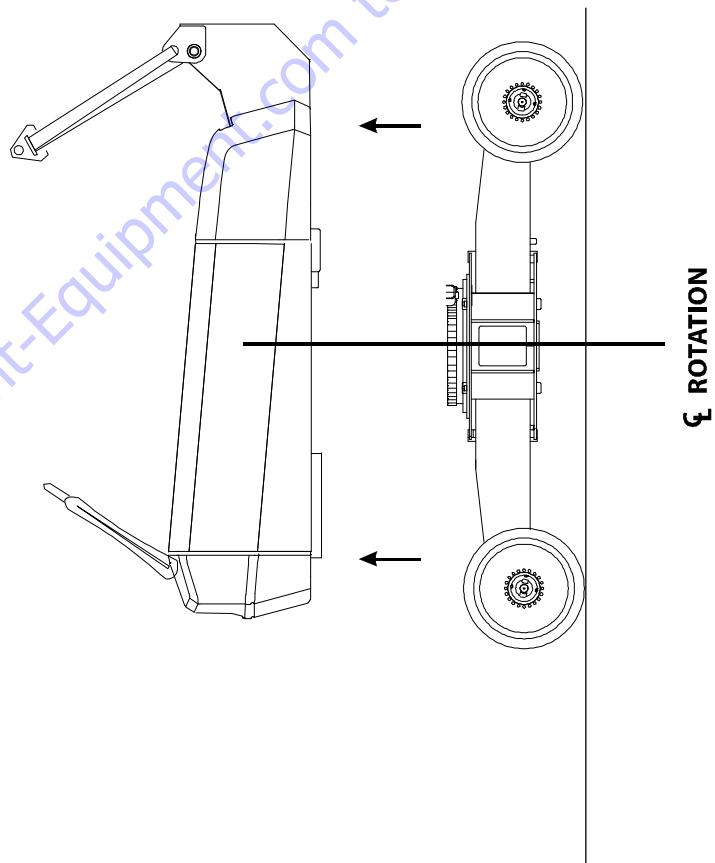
Swing Bearing Removal - Sheet 4 of 4
